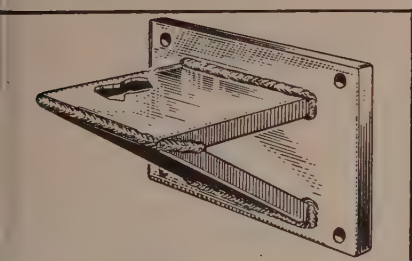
For heavy loading, the cantilever arms made from channels flame-cut to shape and welded.
